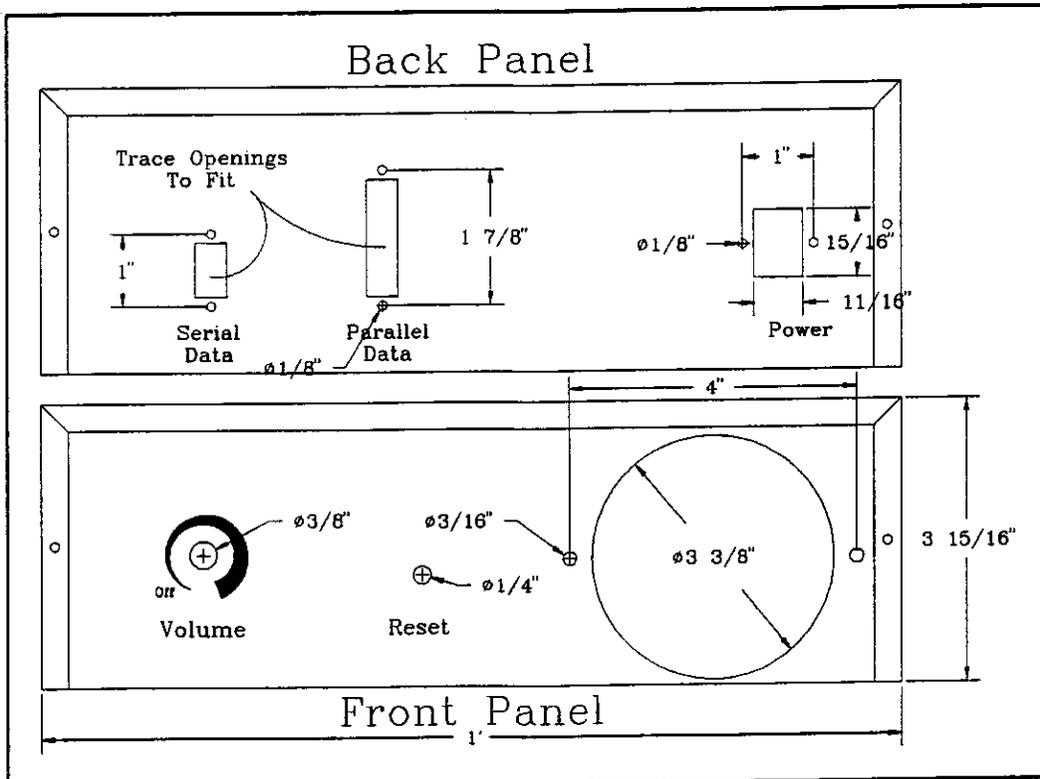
Critical dimensions of housing unit panels, (front and rear)
